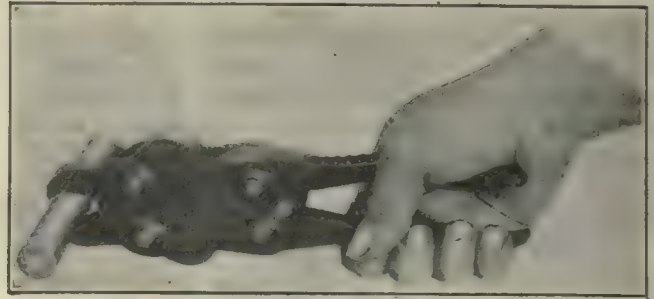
TESTING A GEAR WITH THE "KAVLE" CORRECT INVOLUTE INDICATOR
